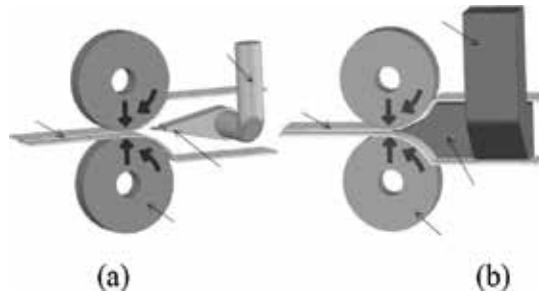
Hot air (a) and wedge (b) welding equipment [1].
